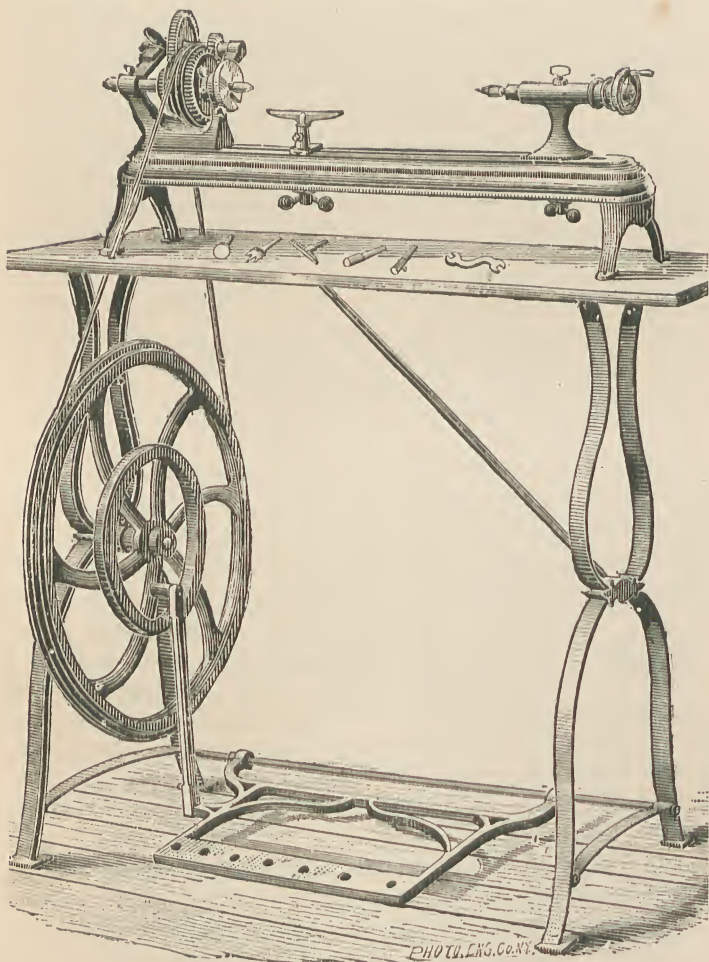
AMERICAN HOLLOW SPINDLE LATHE.
